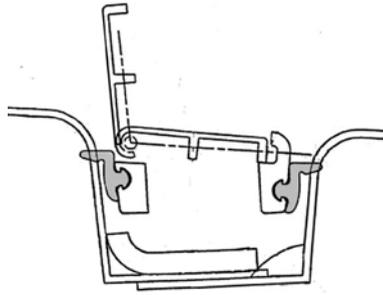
Roof molding section at roof rack bracket housing, with hinged flap.
